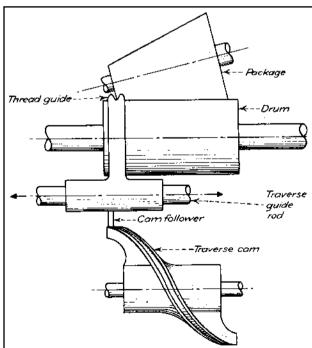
A drum drives the package by friction. A pointed cam shoe, which pivots in the bottom side of the thread guide assembly, rides in cam grooves and produces a reciprocating motion of the thread guide assembly on the traverse bar. Plastic cams have proved to be satisfactory even with fast traverse speeds. Interchangeable cams permit a wide variety of winding methods.
